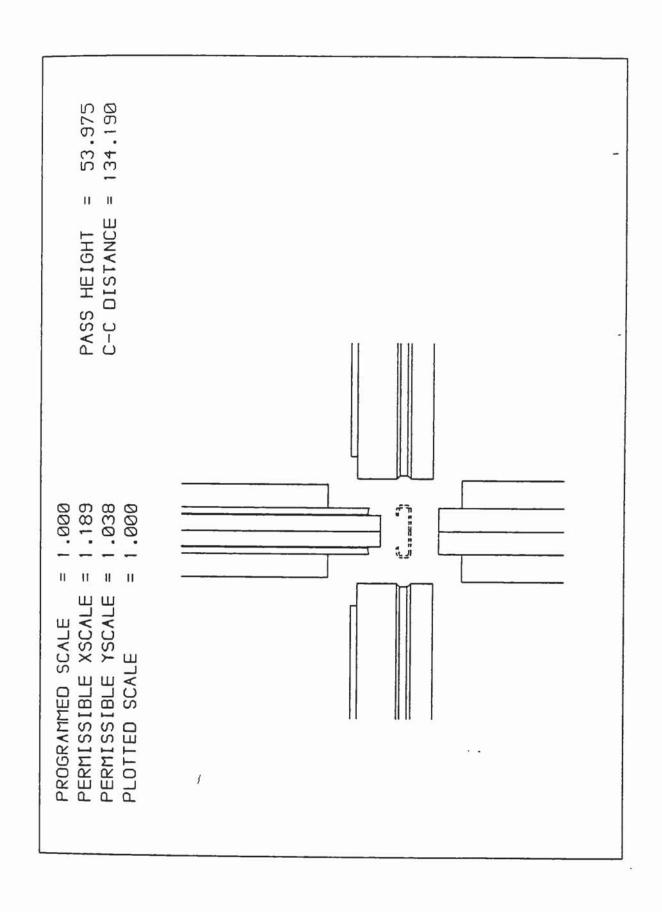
ROLL DRAWING WITH MODIFIED CONTOUR
